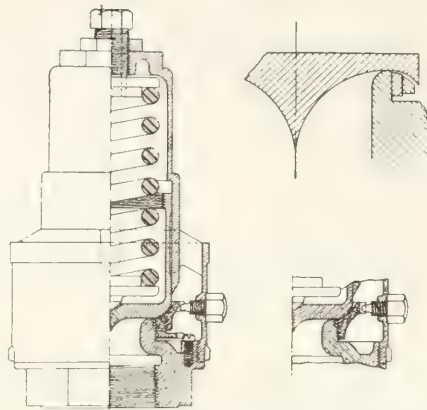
LOCOMOTIVE VALVE OF APPROVED DESIGN.
